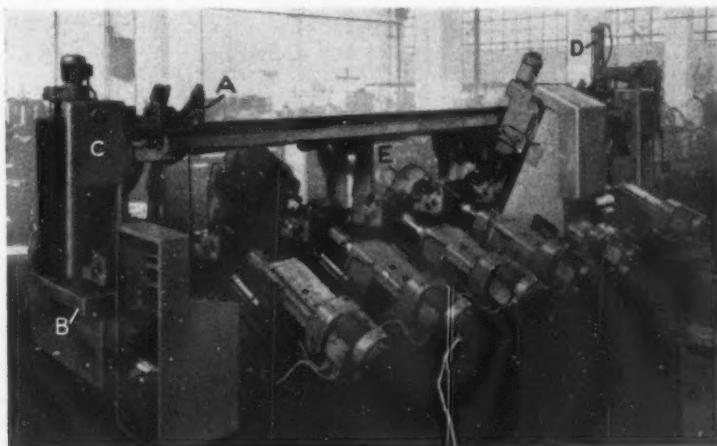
In-line Transfer Machine Built by TOS-Kurim for Handling Cast-iron Axlebox Bearing Housings
